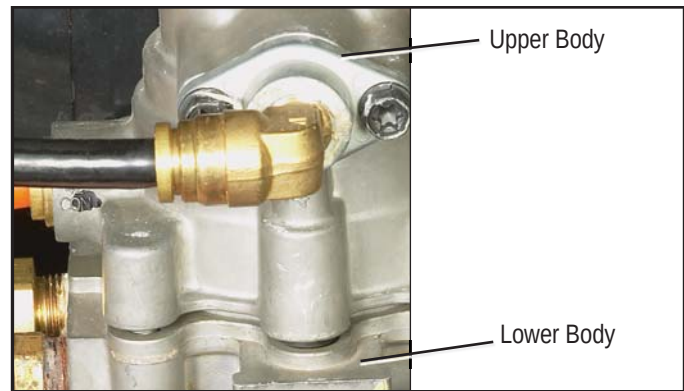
POSITIONING THE UPPER & LOWER BODY
